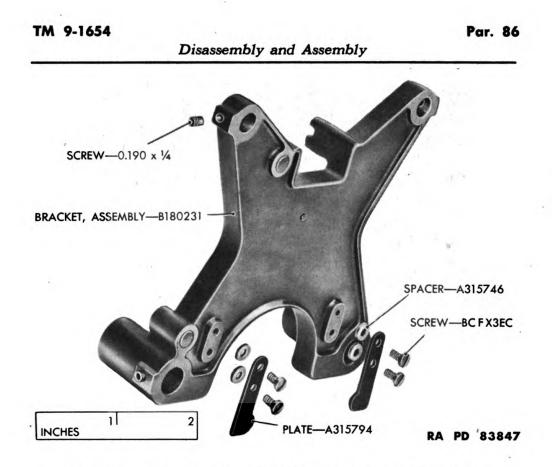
Guide Plates Exploded From Mechanism Kods Bracket Assembly
